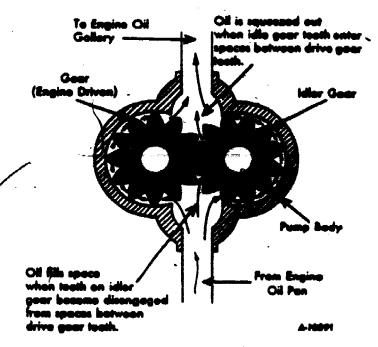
Oil Flow Through Gear Type Oil Pump.
